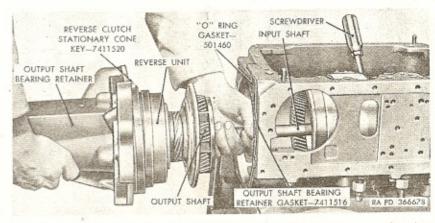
Removing or installing output shaft, output shaft bearing retainer, reverse unit, and input shaft (301MG).
